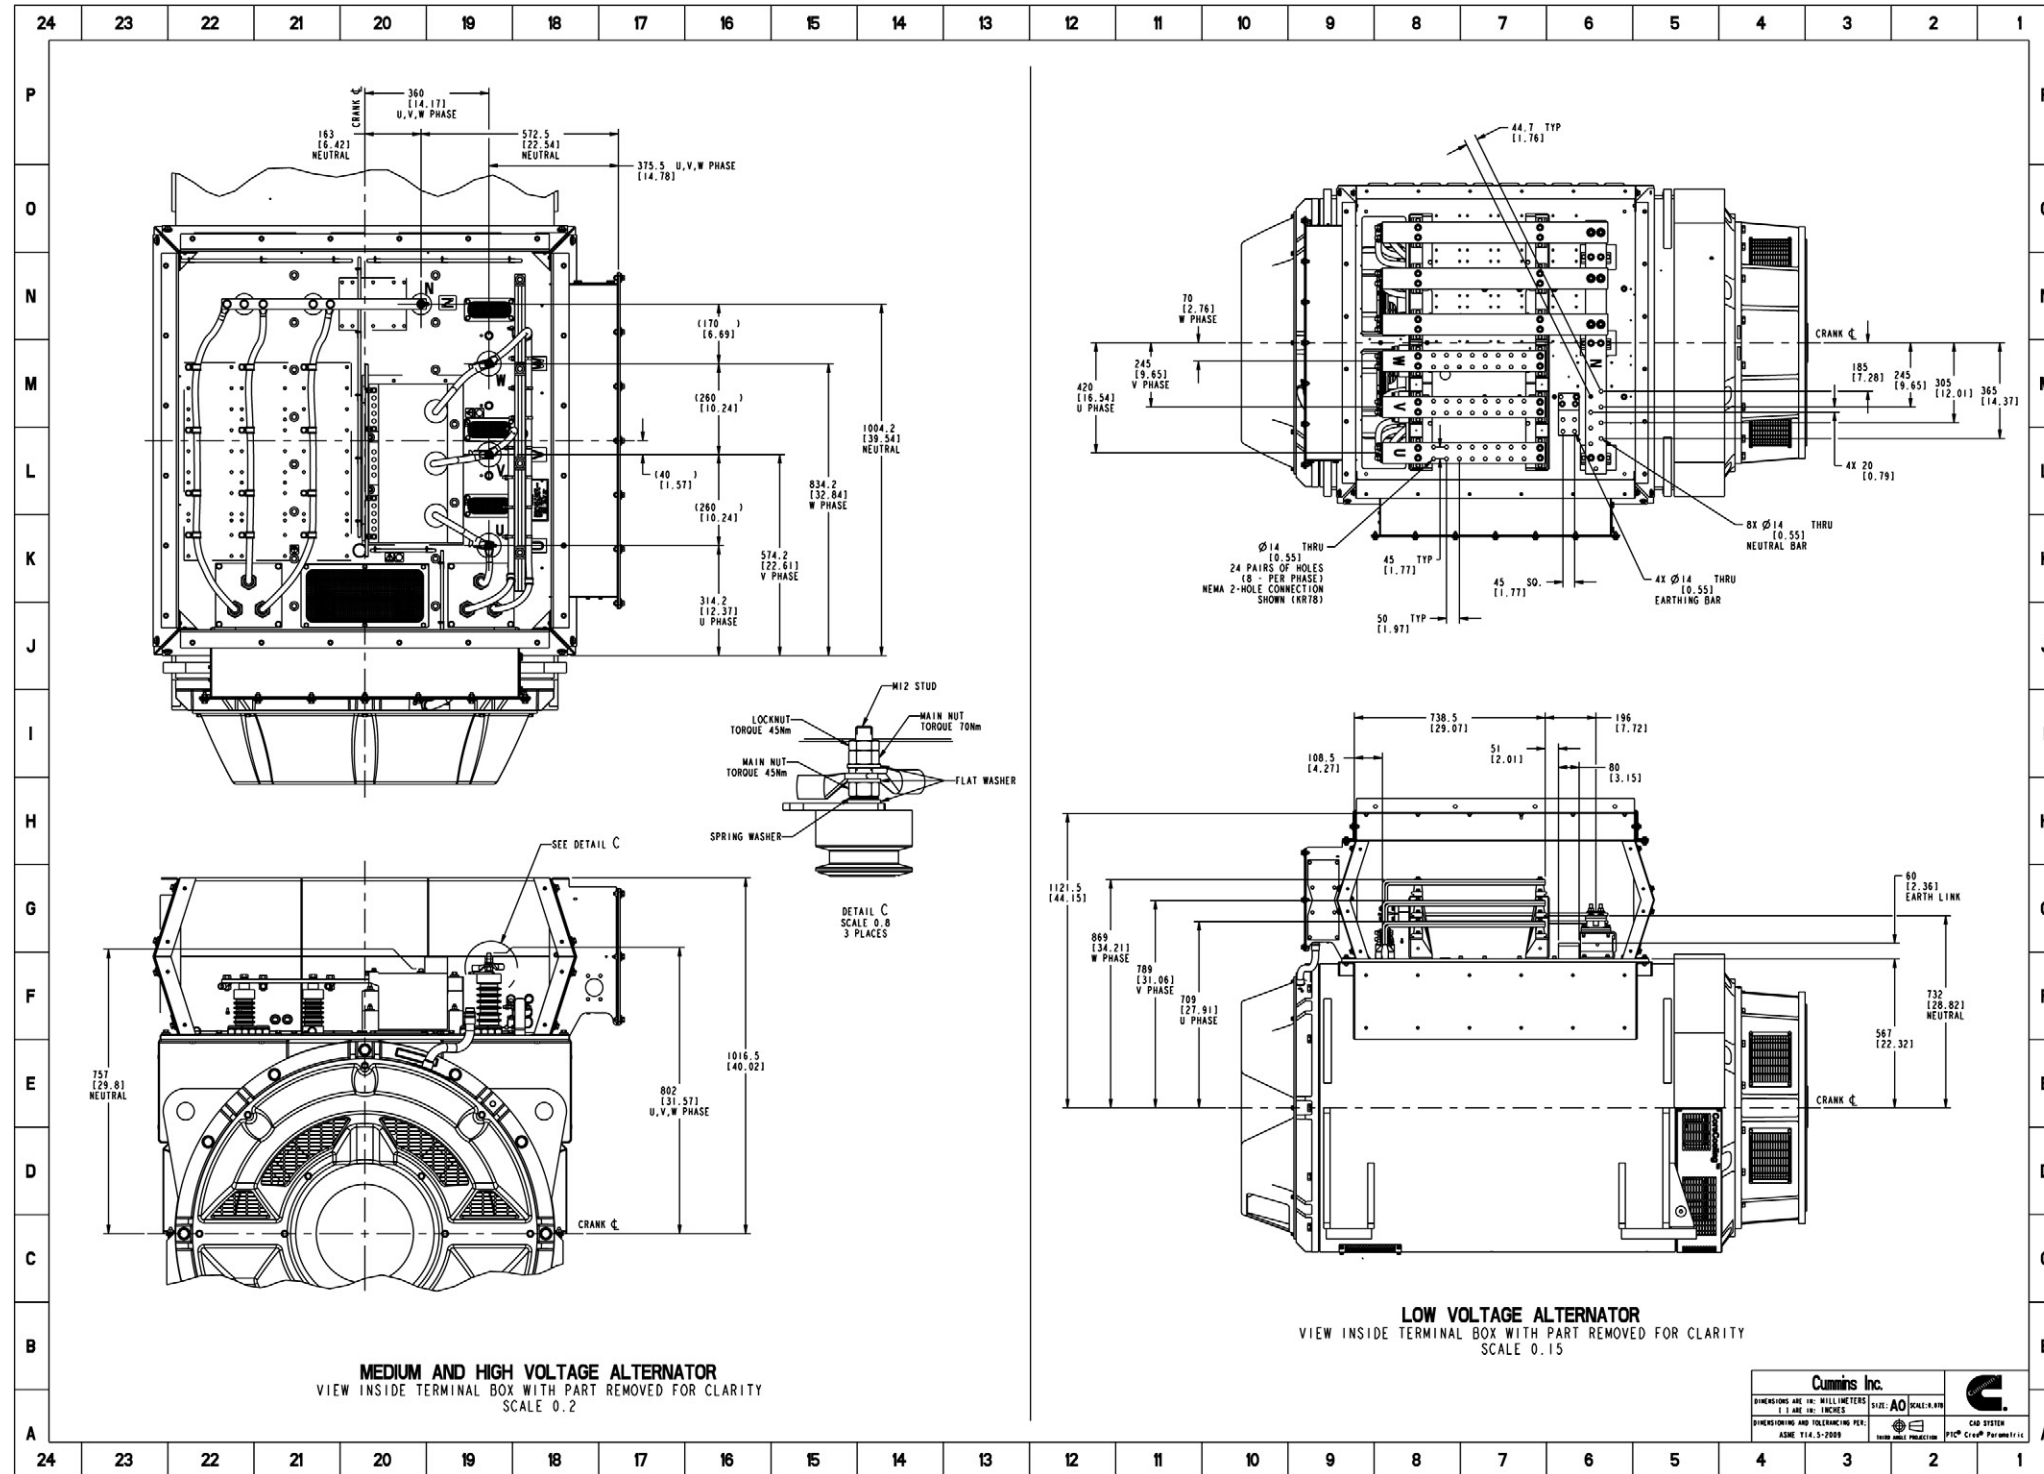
OUTLINE DRAWING (SHEET 7 OF 8)
